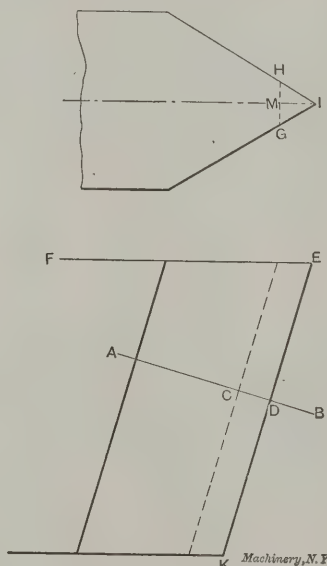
U. S. Standard Thread Tool before Grinding Flat.
